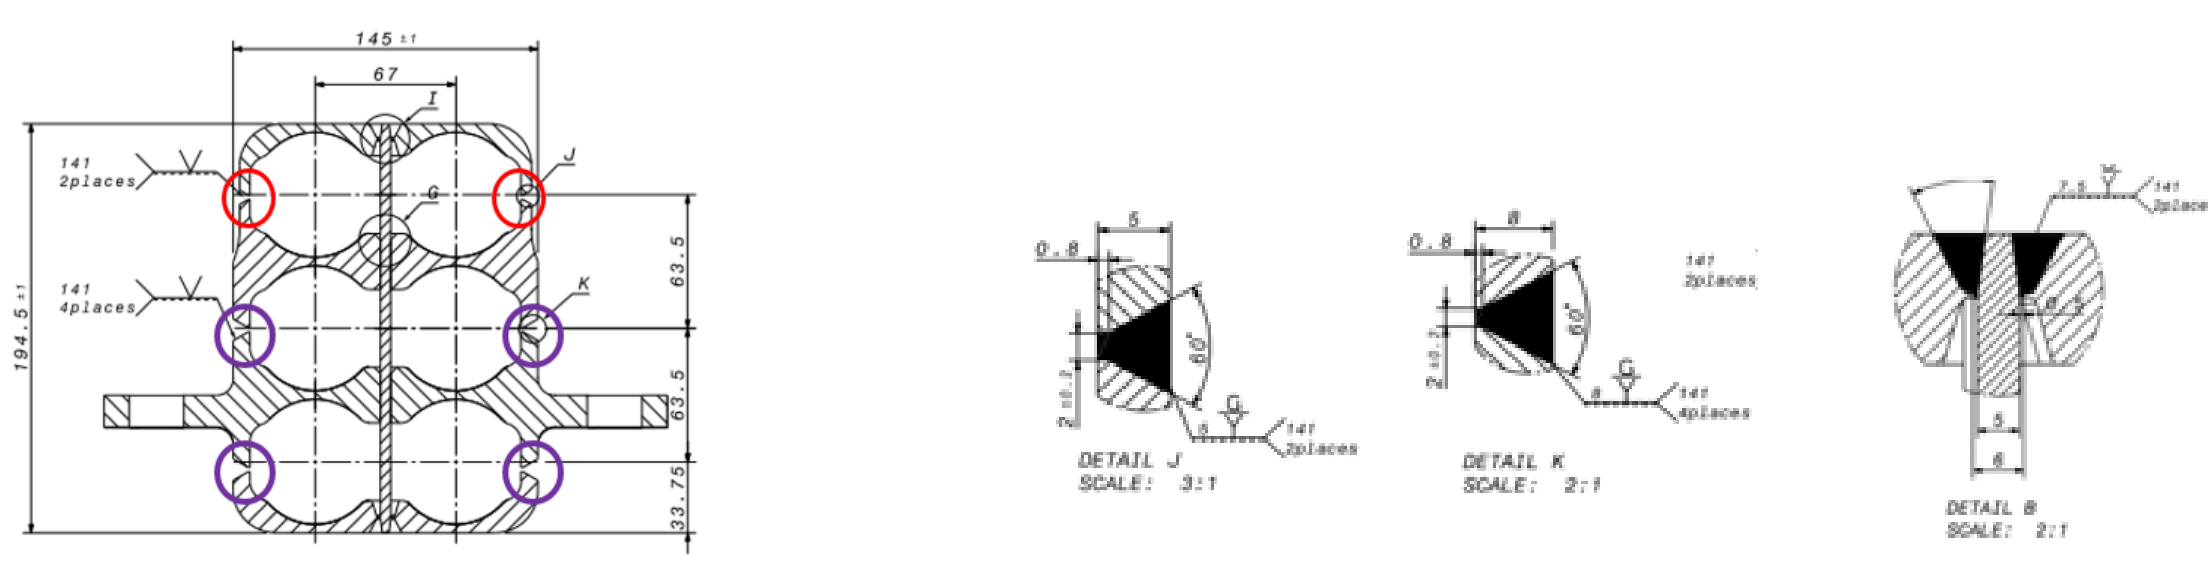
Sidewall and comb welds design in the ELM bracket.
